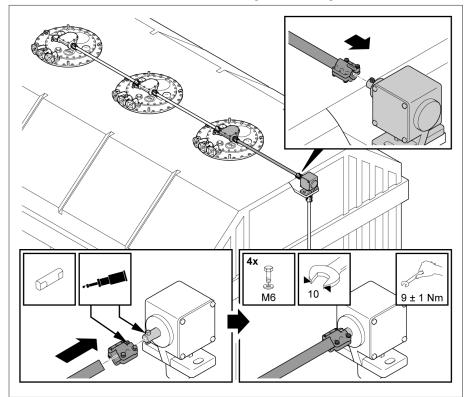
Installing the drive shaft between the bevel gear and the gear unit
